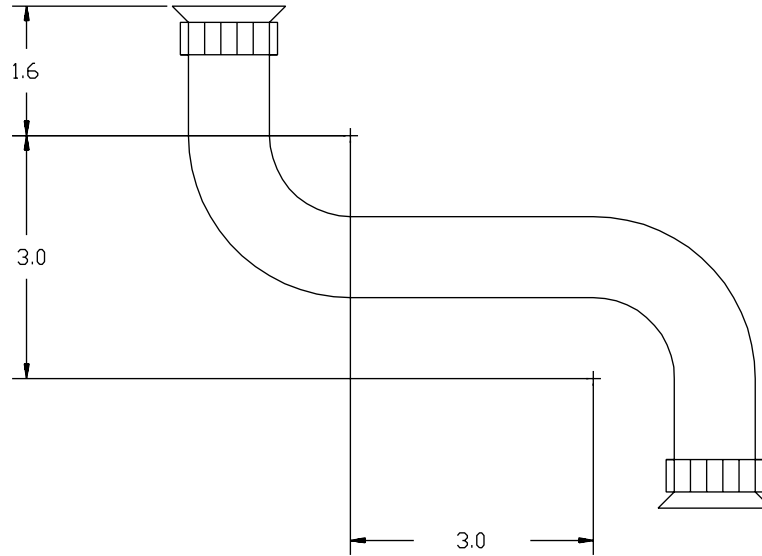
THE ORIGINAL PIPE DRAWING
